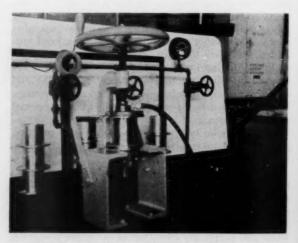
Hydraulic pressure testing rig showing cylinder in place for testing.
